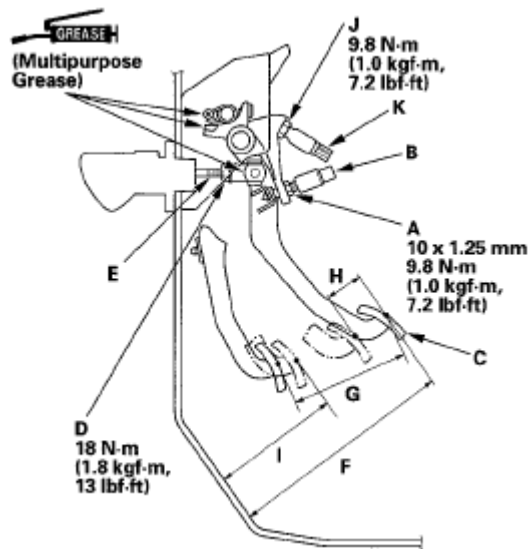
Identifying Clutch Pedal Switch Locknut With Torque Specifications
